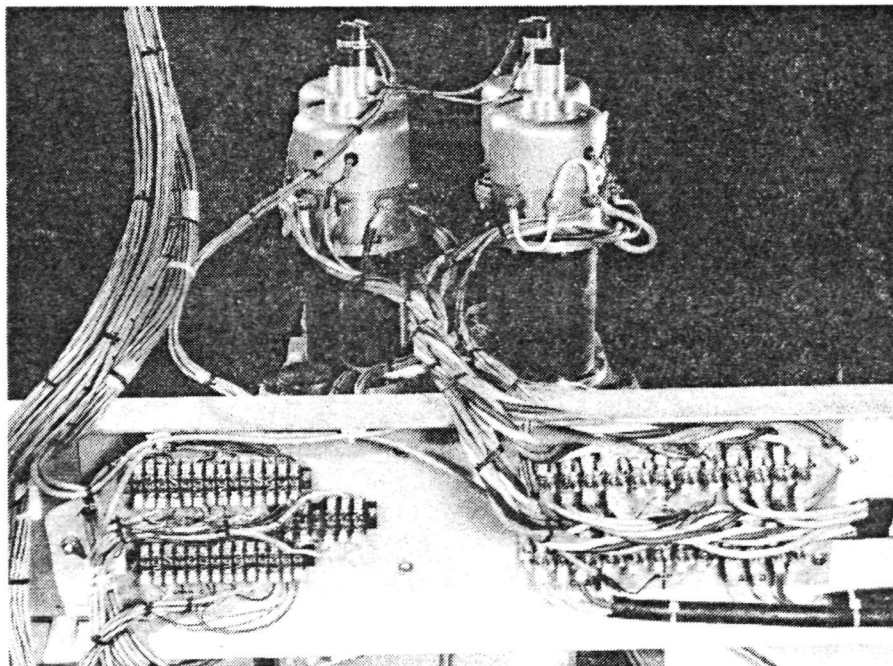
Motor/Gearbox Assembly (Rear View)
